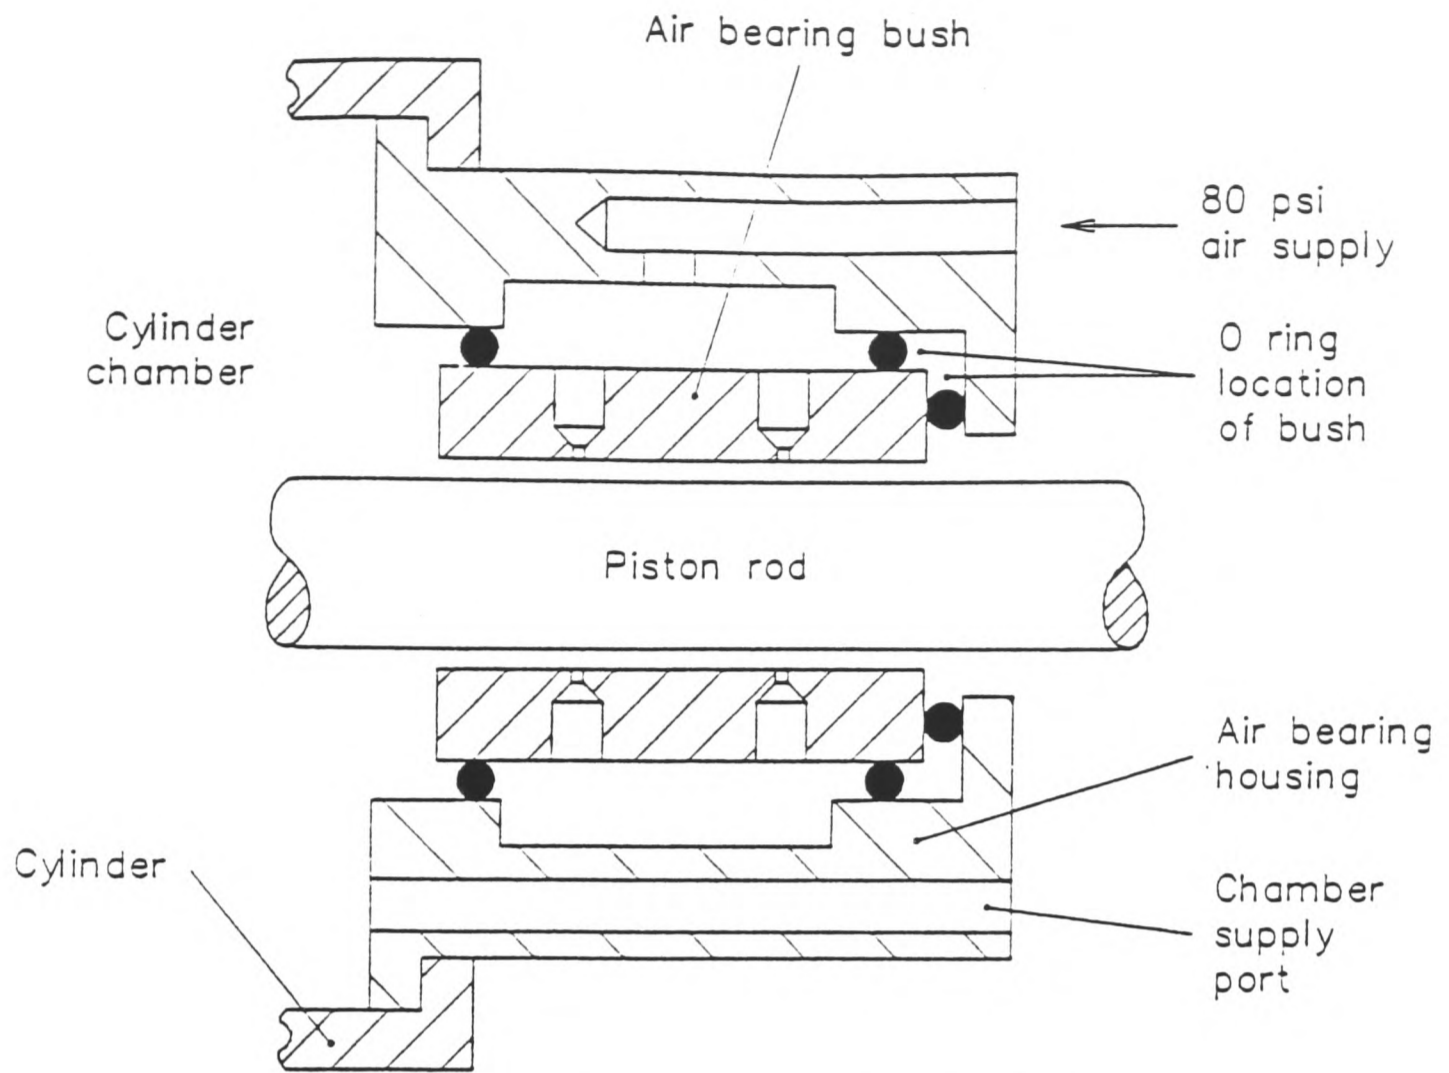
Sketch of air bearing assembly used in Cylinders 1 and 2
